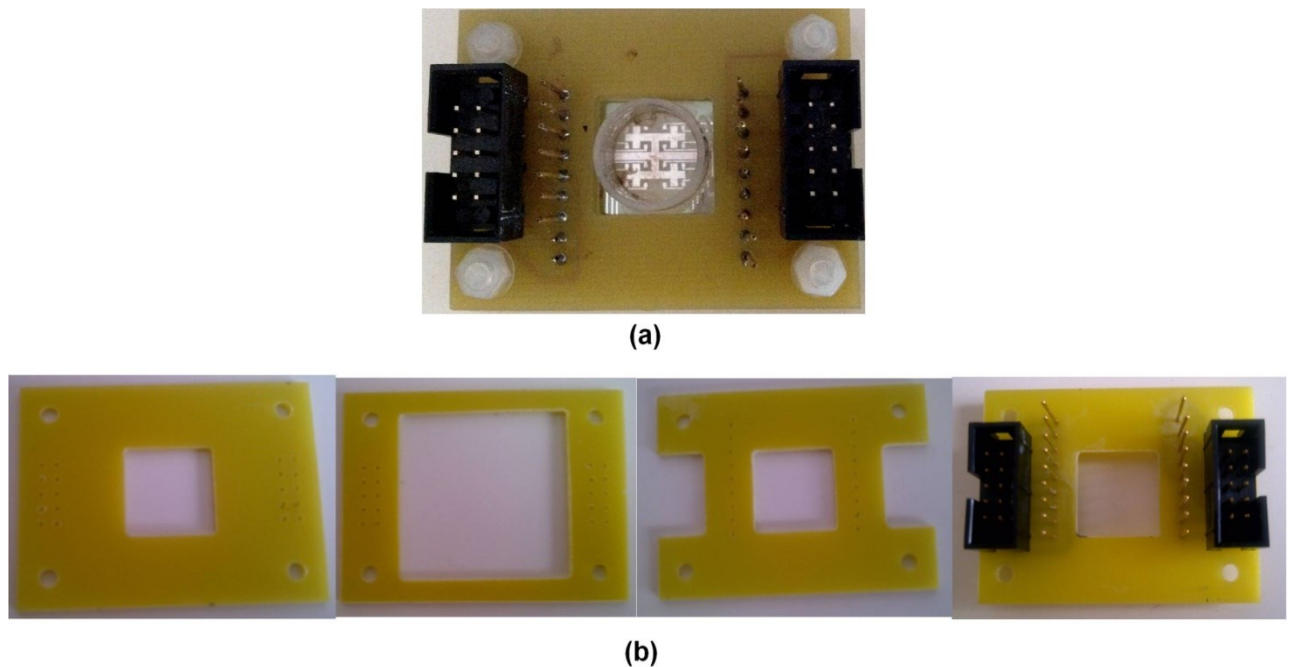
PCB for MEA-ECIS connection. (a) A picture of the PCB assembly holding a MEA chip with a culture chamber on top. (b) An exploded view of (a) showing the different layers of the PCB.
